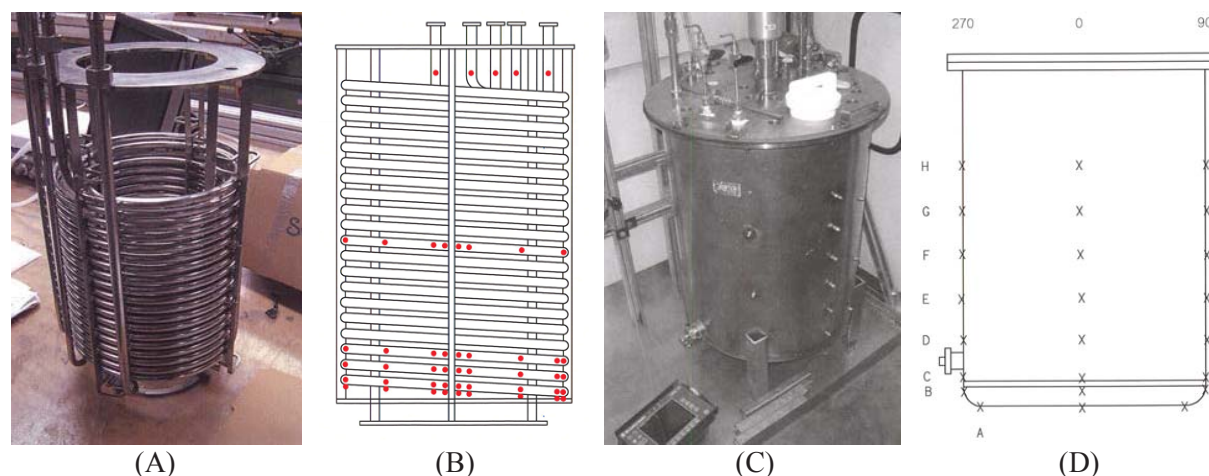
Large scale test vessel and heating coils: (A) coil photograph, (B) coil UT locations, (C) vessel photograph, and (D) vessel UT locations
